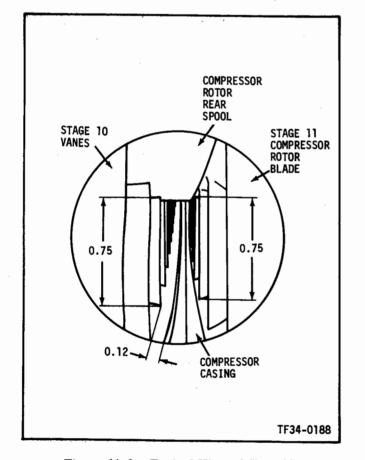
Typical View of Stage 11 Compressor Rotor Blades
